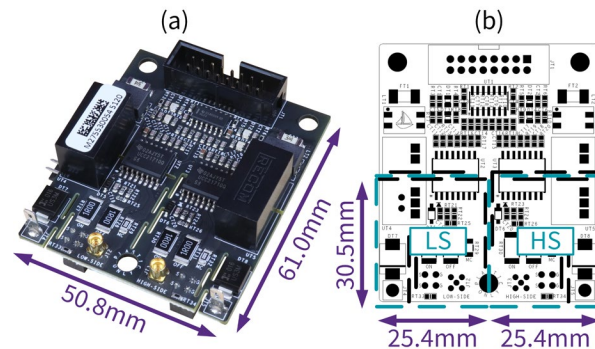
Dimensions of compact gate driver: (a) full [CGD1700HB2M-UNA](#) and (b) high/low-side driver circuits
